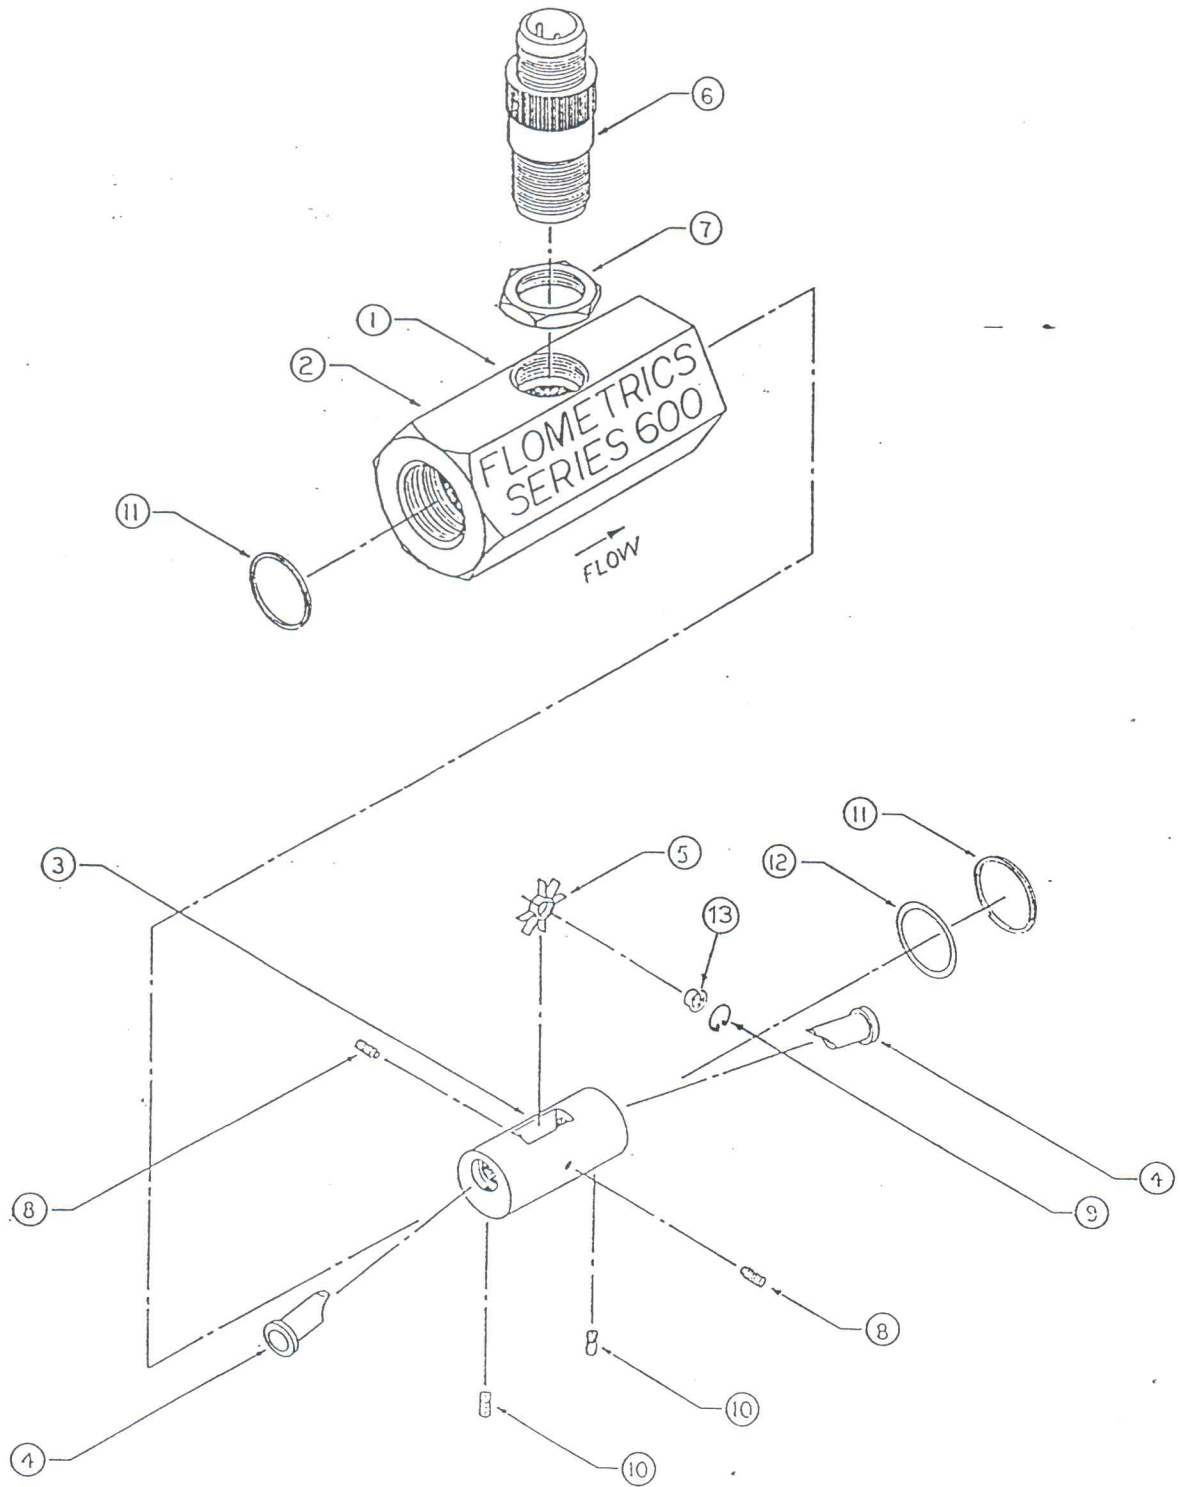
EXPLODED VIEW OF SERIES 600 TANGENTIAL TURBINE METER
